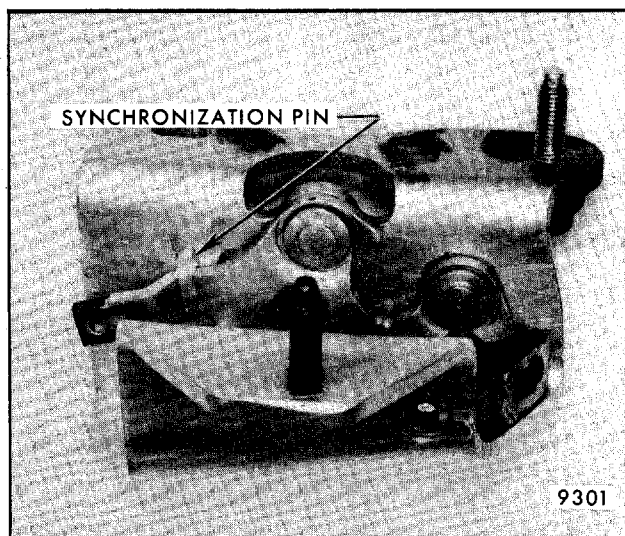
Tailgate Left Upper Hinge Lock Synchronization Pin
